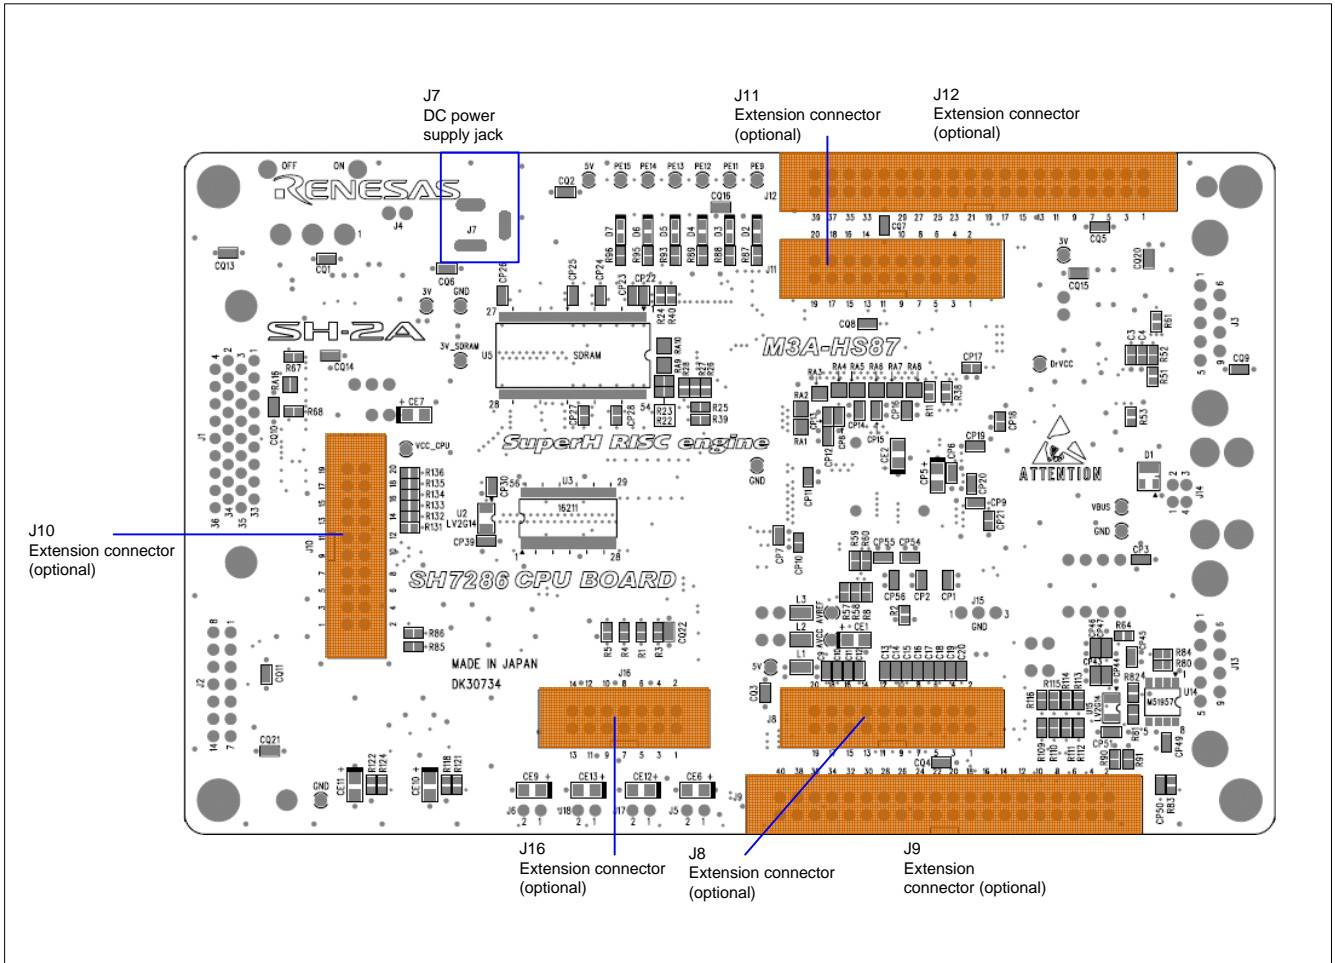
Connector Assignments (Top View of the Solder Side)
